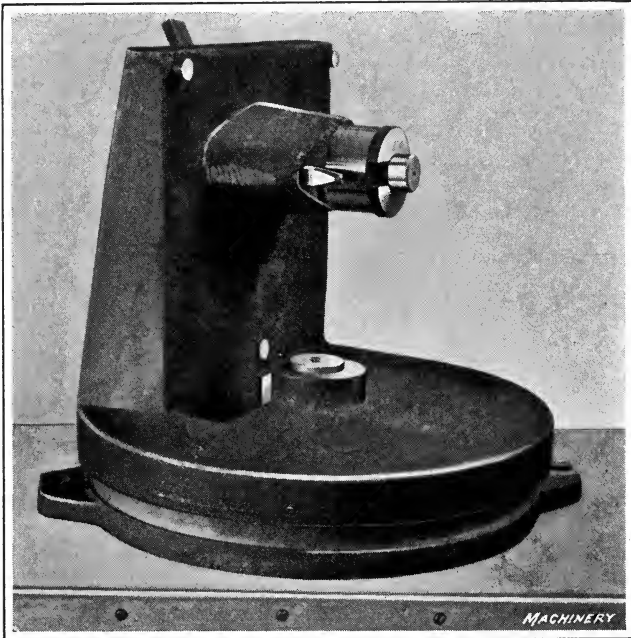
Pivoted Ball-bearing Fixture used in Tapping Operation
